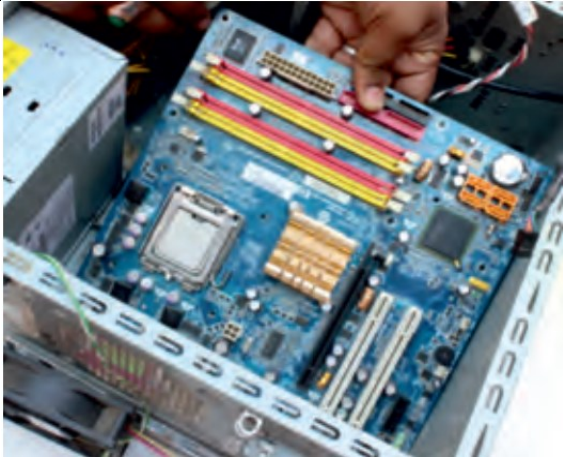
lay the motherboard over the standoffs Fig. 1.11: Tighten all the motherboards screws
